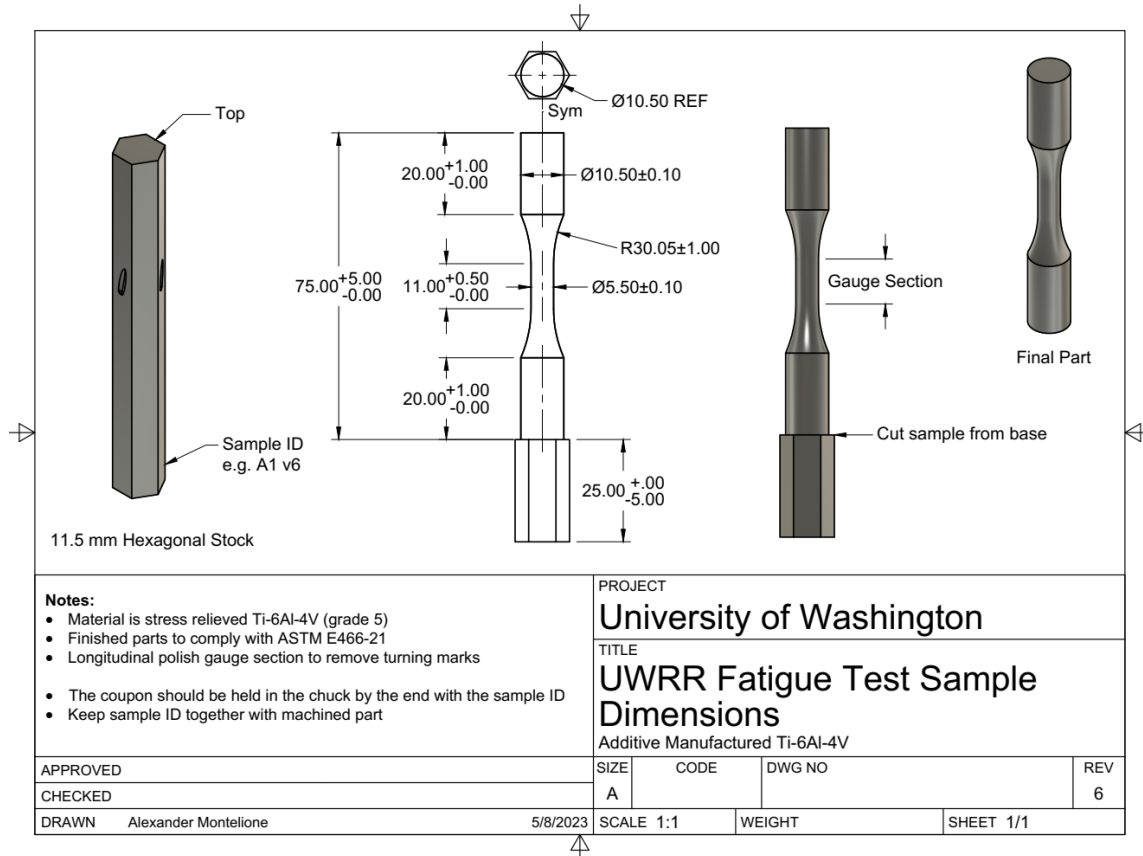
Machine drawing for acquiring the fatigue coupons from the printed hex bars.
